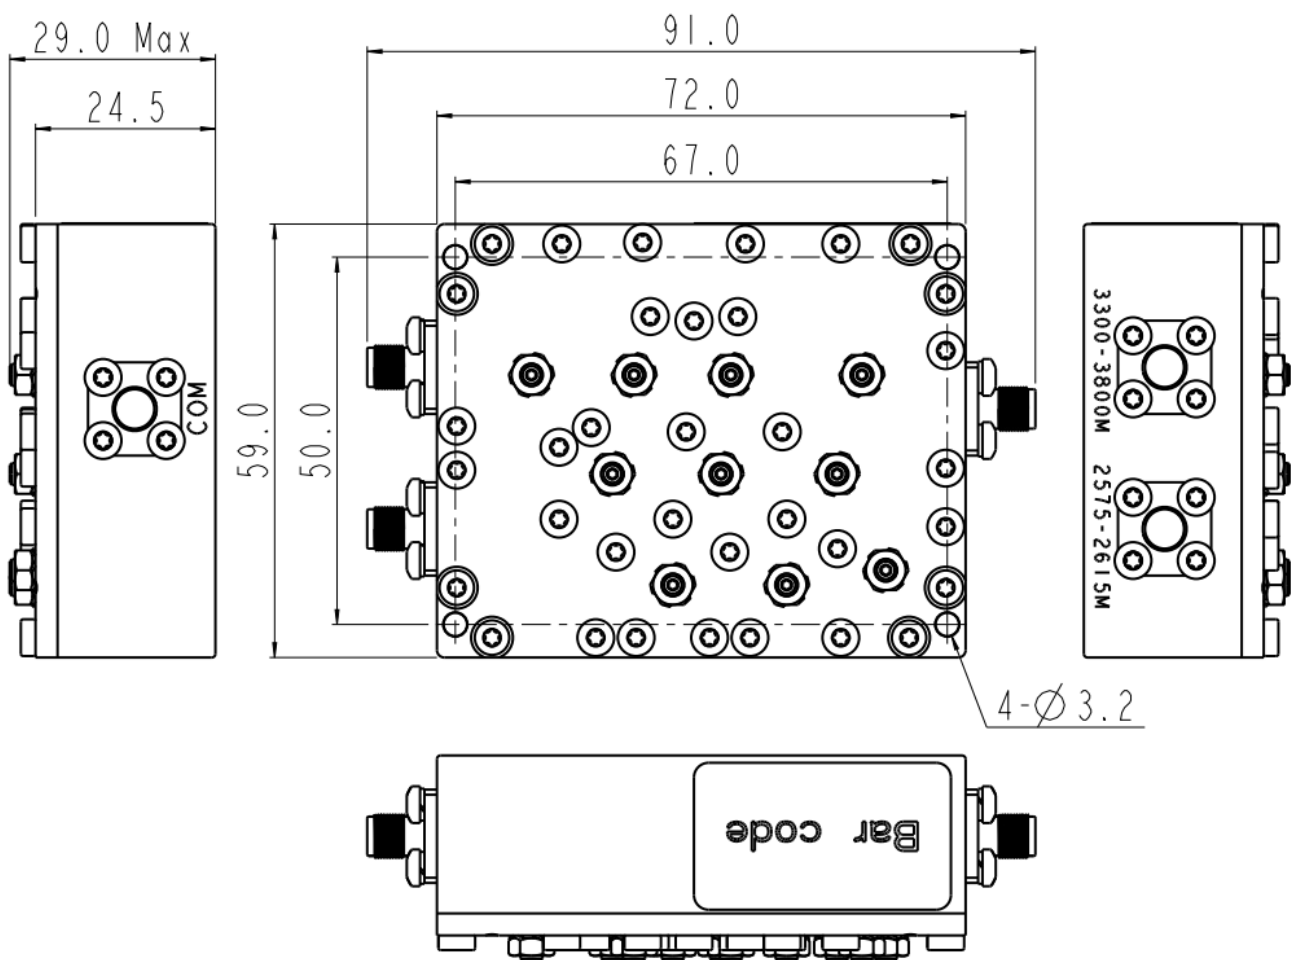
JX-CC2-2575M3800M-60S front panel layout
